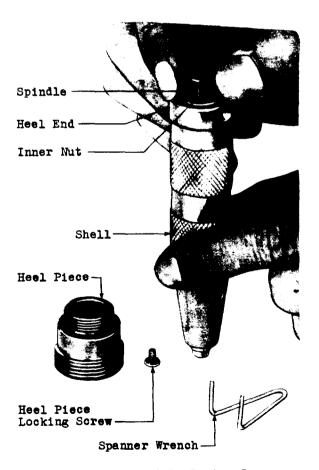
Method of Replacing Inner and Lock Nuts in Hand Piece
